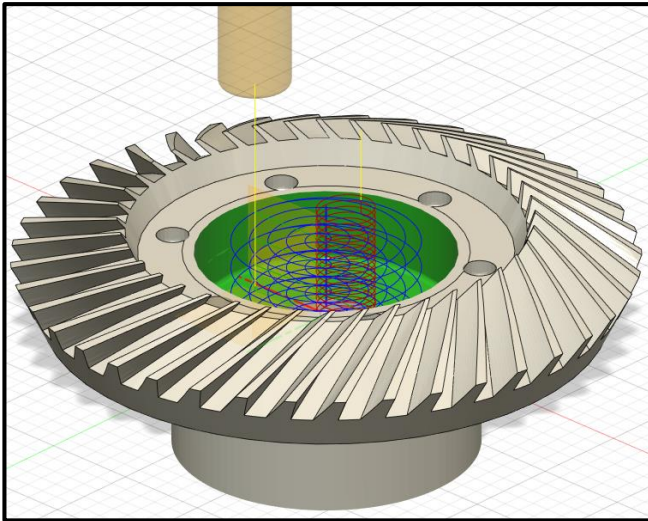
Adaptive Clearing Operation Tool Path Generated in Fusion 360 for the Large Gear
